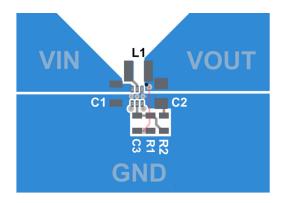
TPS62A01x-Q1 PCB Layout Recommendation
